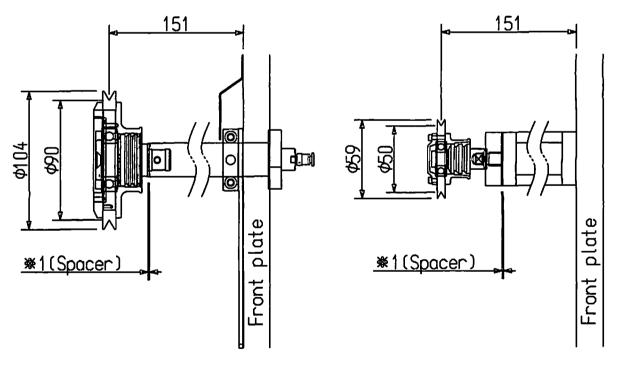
Multi Wire Web Additional Parts(Example) wsD-k2 M001WsD06Z020
